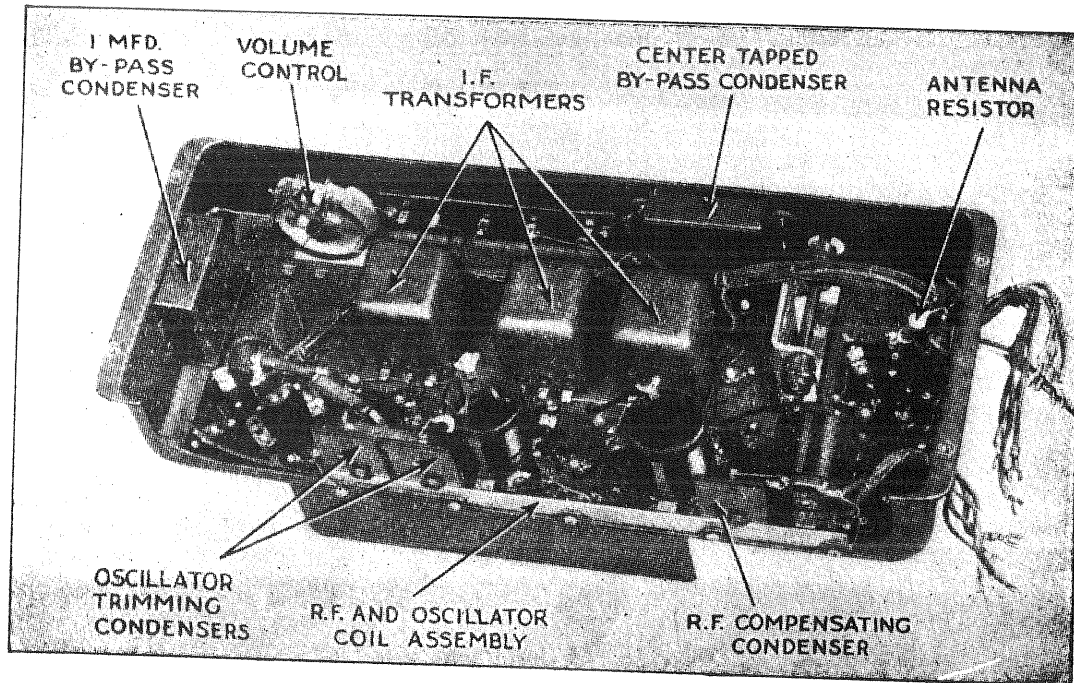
Receiver sub-chassis assembly, showing location of various parts
